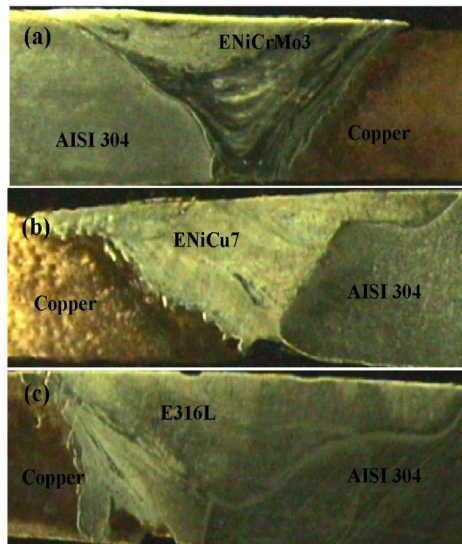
Macrophotographs of dissimilar welded AISI 304 and CP Copper with three different filler materials, (a)ENiCrMo3, (b)ENiCu7 and (c)E316L
